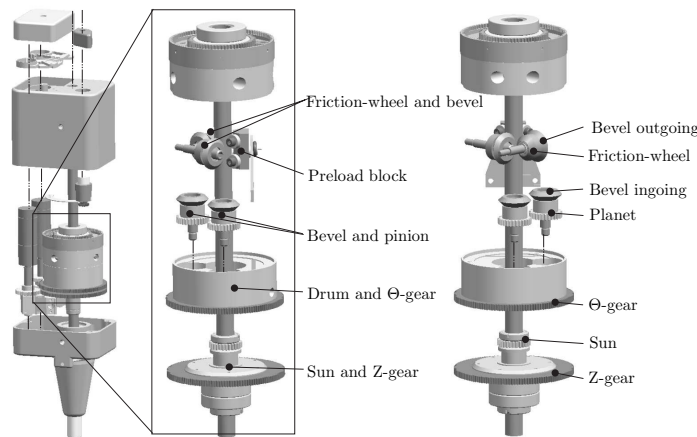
$\Theta Z$ -manipulator: exploded-view of the  $\Theta Z$ -housing and of the drum.
